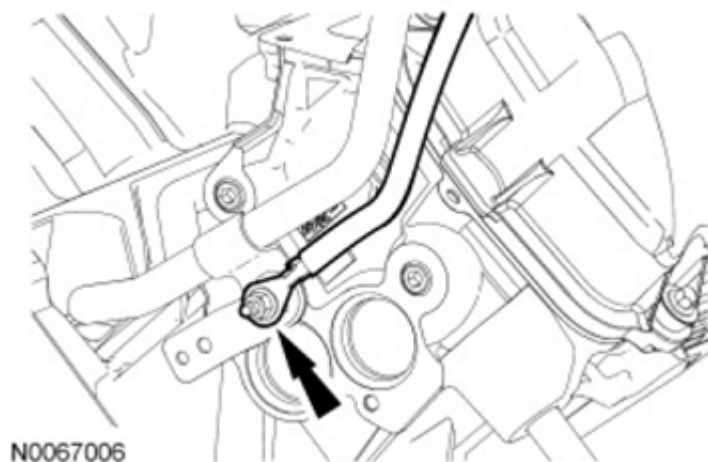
Locating Engine Wiring Harness Ground Straps And Nut
